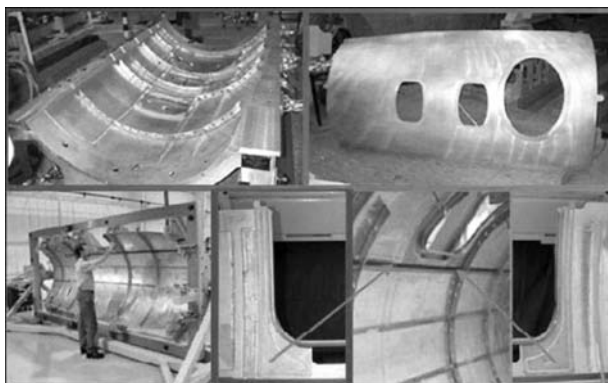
Elimination of riveted joints of overlapped welds using FSW (access mode: <http://www.dvs-ev.de/lvmv/downloads/schweibote0207.pdf>)
